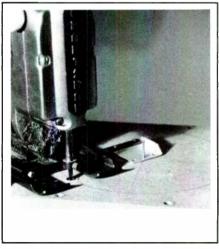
Cutting woofer mounting hole with a saber saw and guide assembly.
